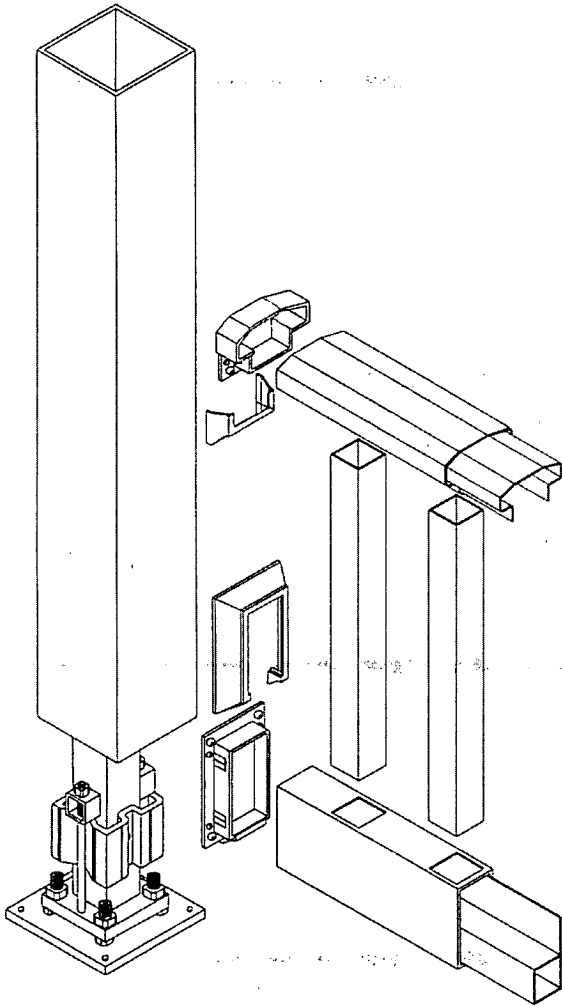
LXT GUARDRAIL SYSTEM ASSEMBLY
